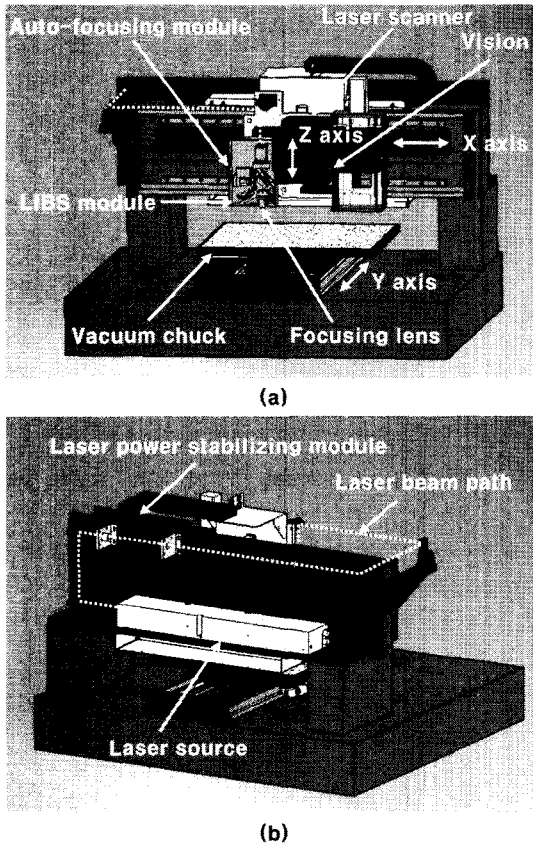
Schema of the laser micro-machining platform: (a) front and (b) rear view.
